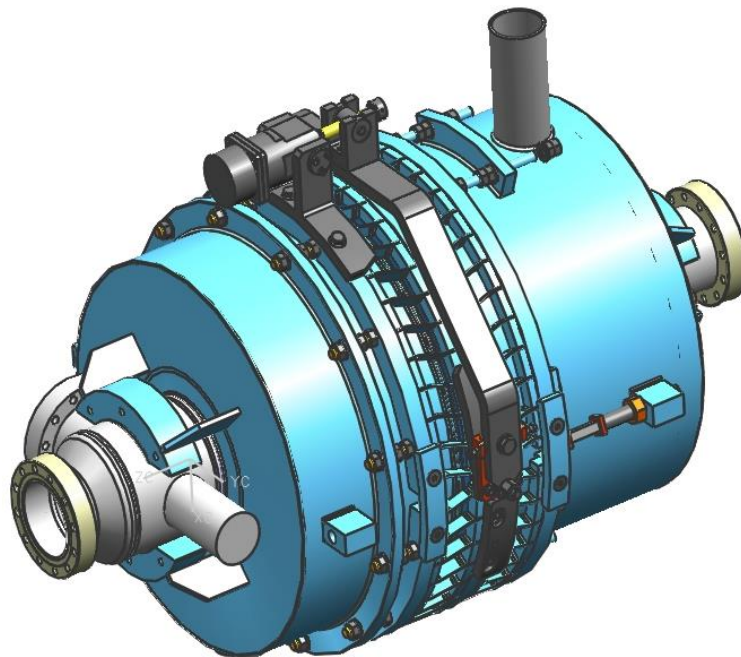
Scetch of the leverage mechanism, the rings-blades assembly and the He tank [17]
